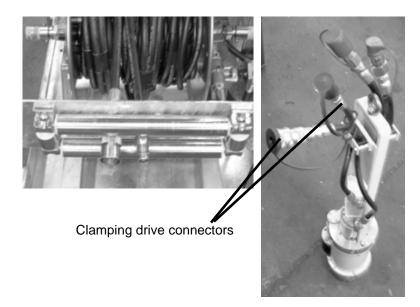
The clamping drive hoses are on the left hose spool at the back of the control station. They connect to the larger pair of connectors on the cutting machine.
